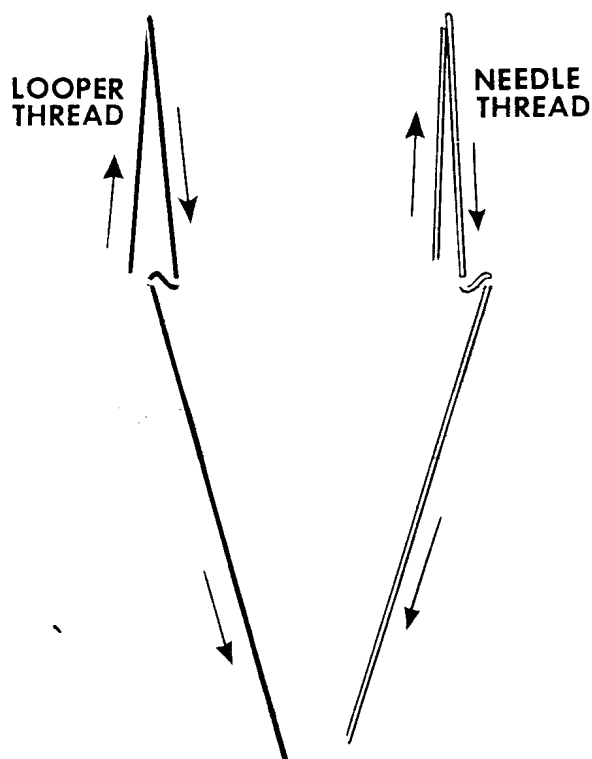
Unwinder 151031 Threaded for Two-Thread Stitch
